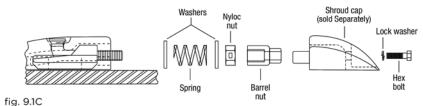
B NOTE: Above assembly is show for illustrative purposes only. Not all assemblies utilize all parts shown.
